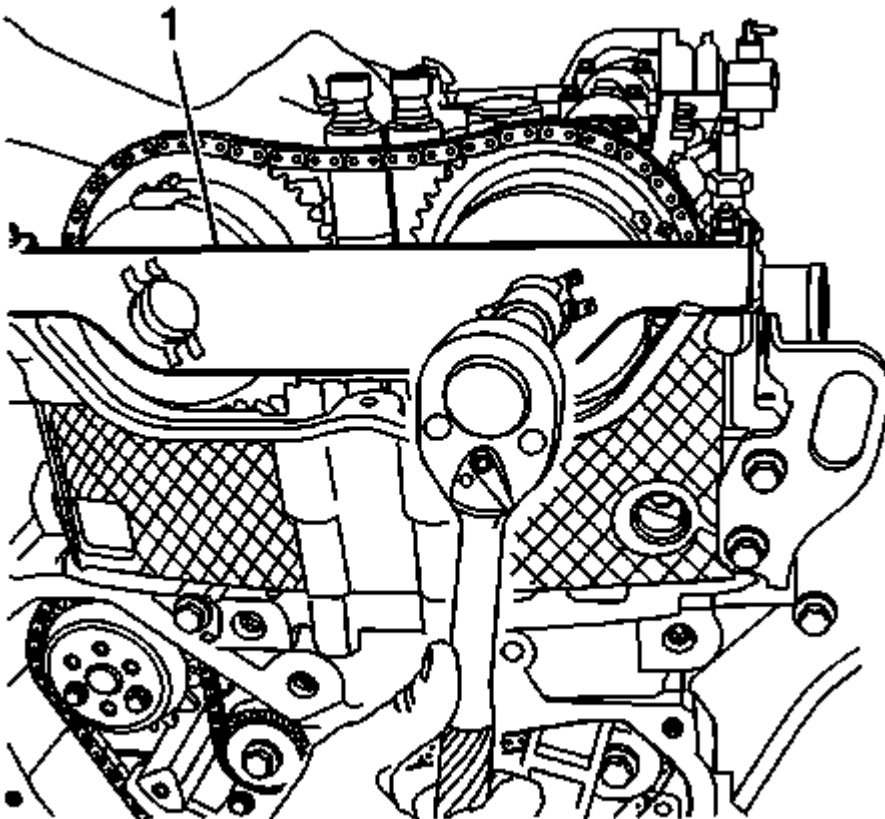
View of Loosening/Tightening Camshaft Actuator Retainer Bolts
